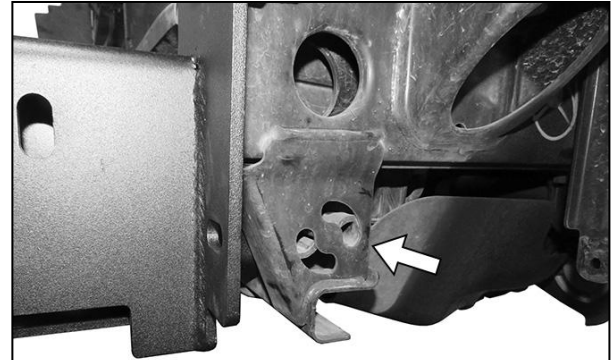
Attach sensor to Relocation Bracket. Attach Bracket to Bolt Plate (fig 11)
